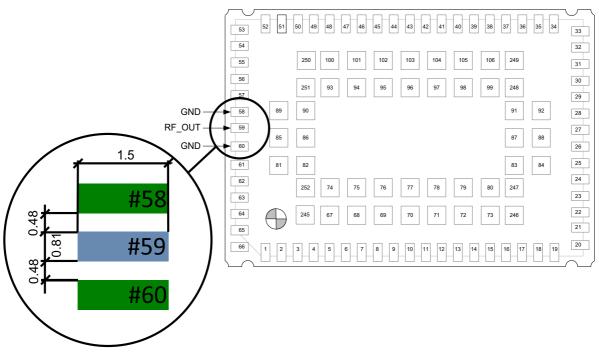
Recommended RF pads pattern in user PCB (dimensions in mm)
